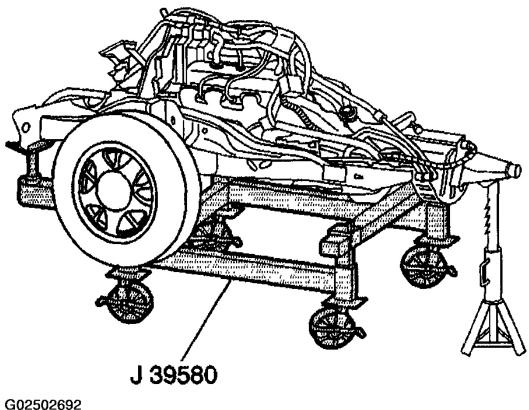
Identifying Universal Engine Support Table (J 39580) Courtesy of GENERAL MOTORS CORP.
